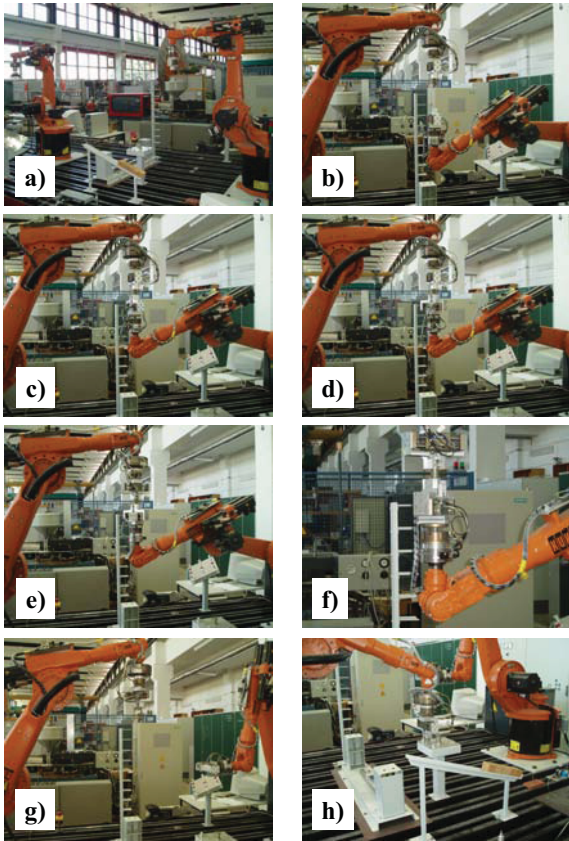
Assembling of nut and thread bolt by Robot-robot collaboration under force/torque control.
